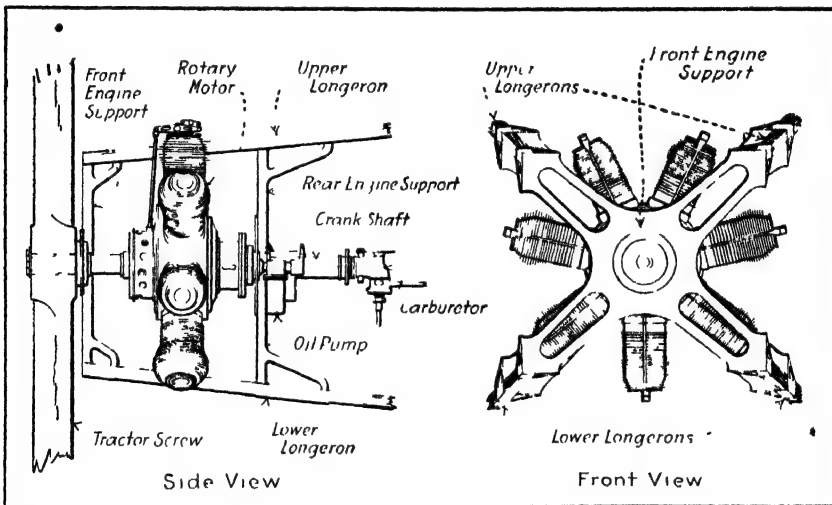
How Gnome Rotary Motor was Sometimes Attached to Airplane Fuselage, so Complete Enclosure Could be Secured by Cowling.
